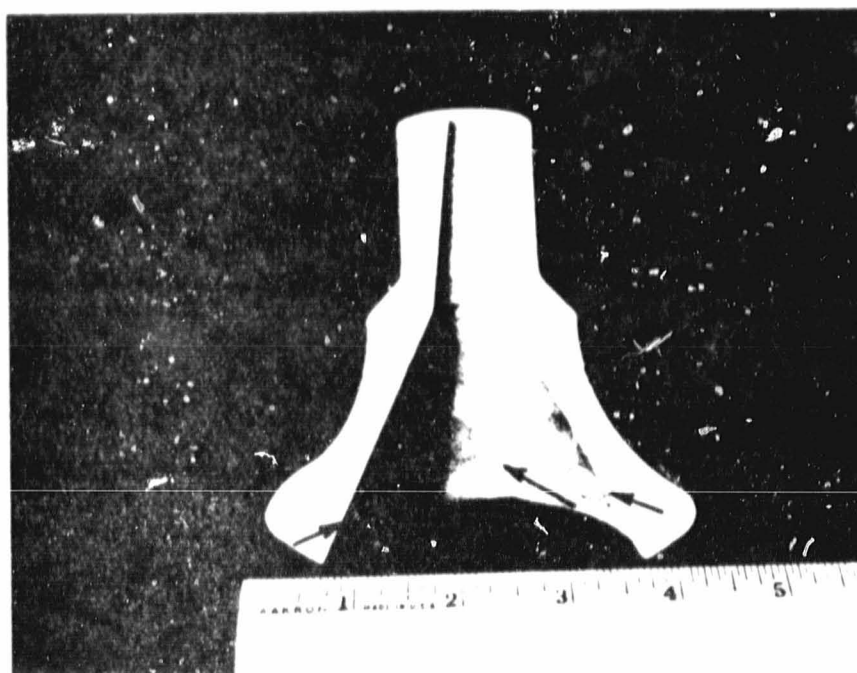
Cross-Sectional View of First Generation Rotor Shell as Molded.
